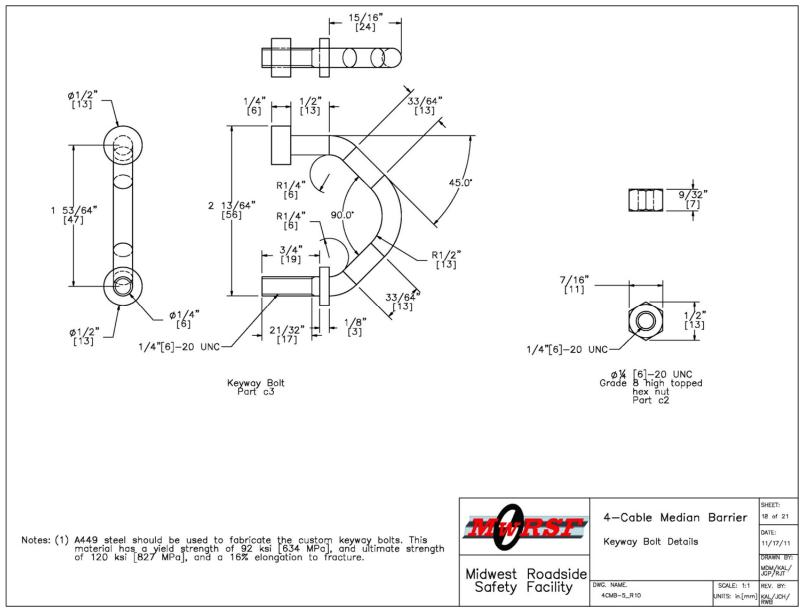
Keyway Bolt Detail, Test No. 4CMB-5
